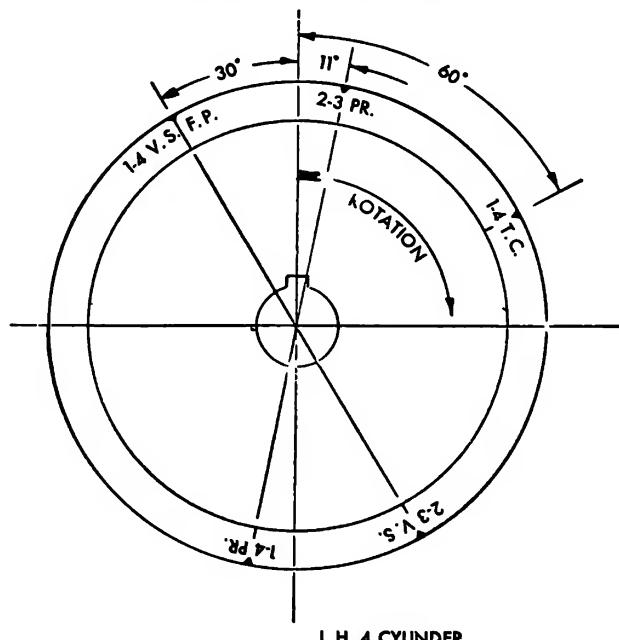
Timing marks on 4 cylinder left hand engine fan drive pulley
